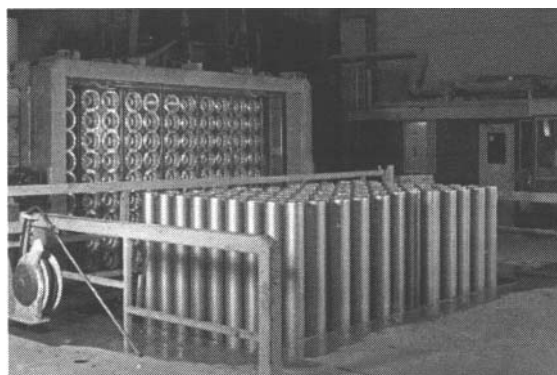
Casting machine equipped with Hycast™ Gas Cushion Billet Casting System in a Hydro casthouse.
